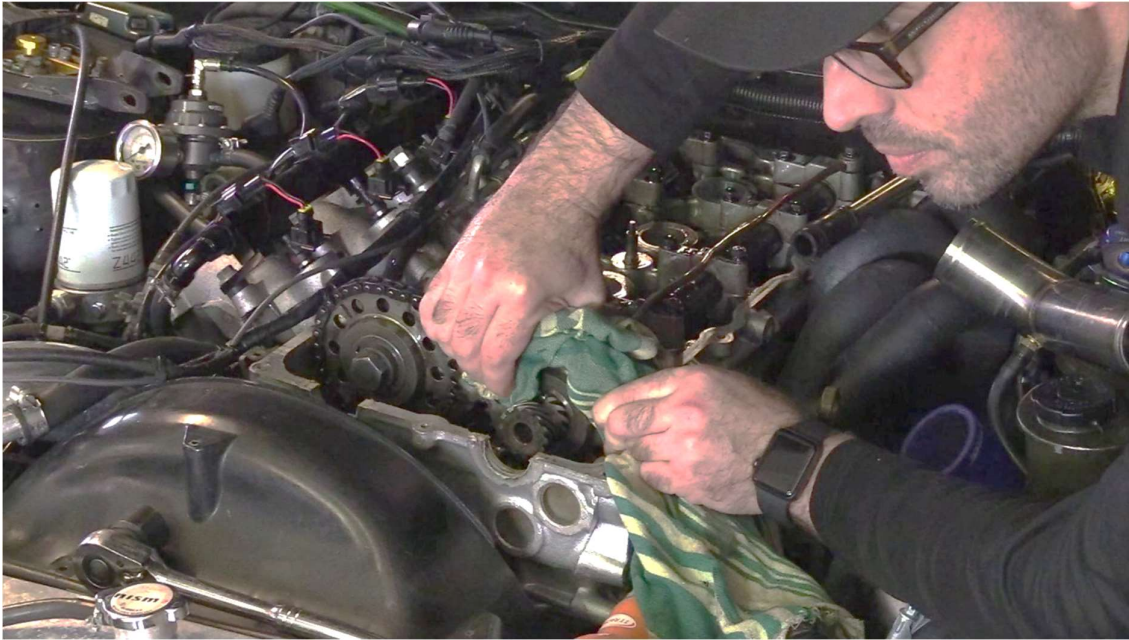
Remove the Exhaust Cam Sprocket Bolt
